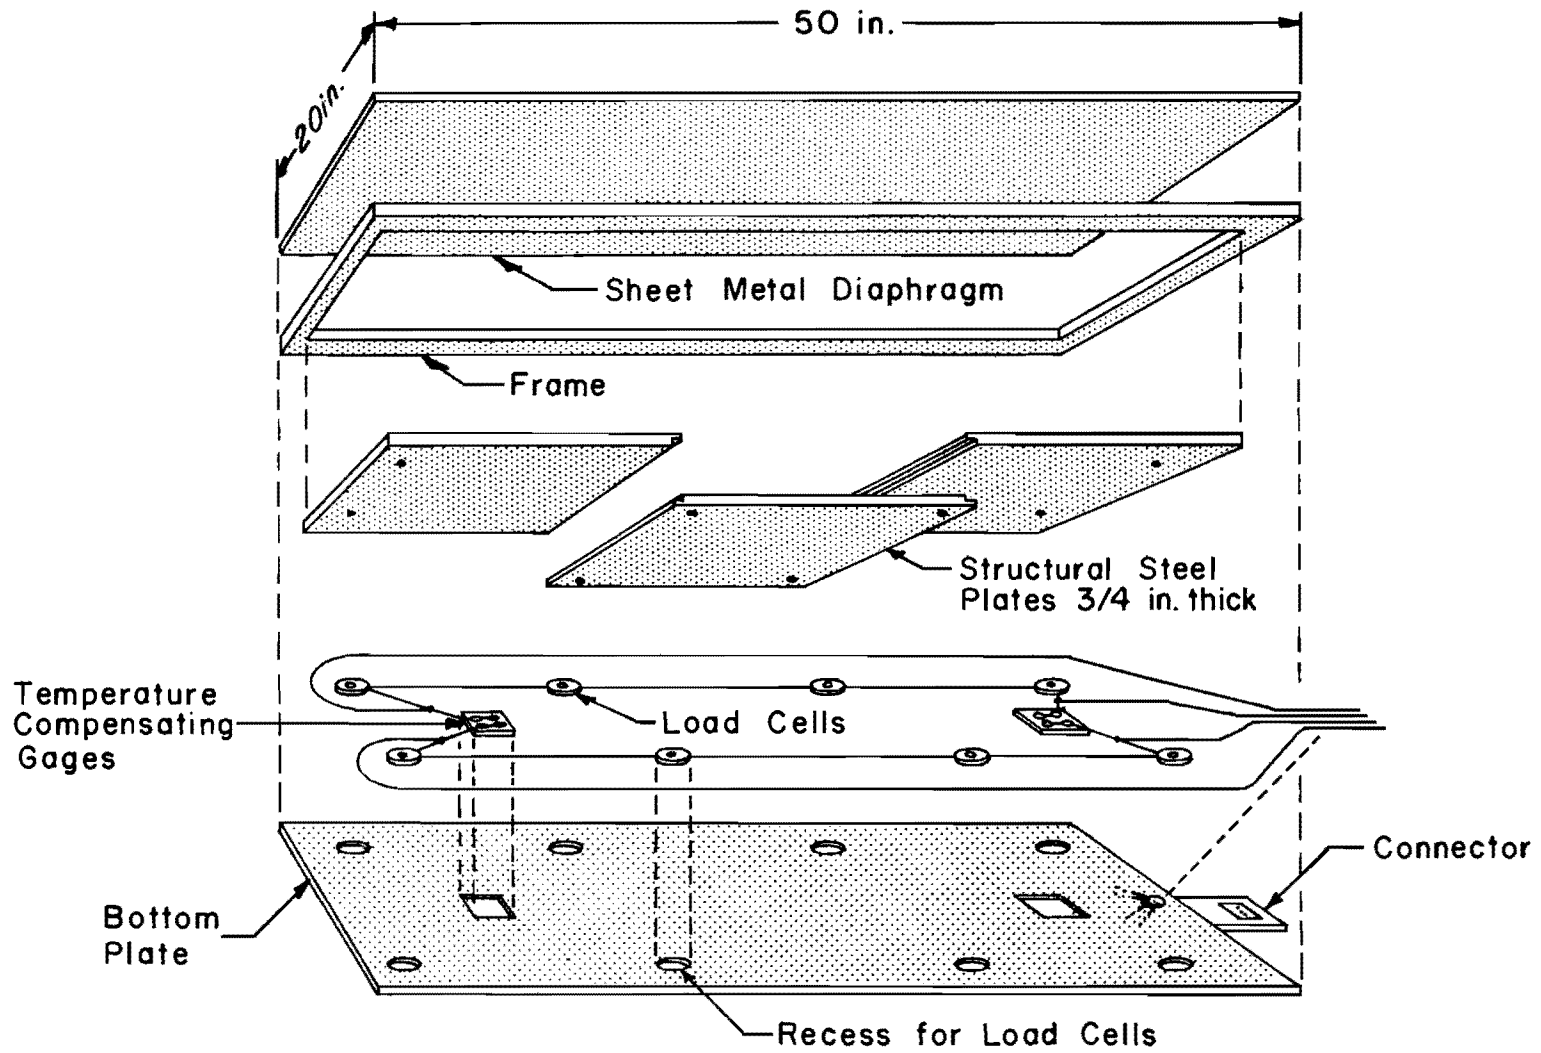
Exploded view of wheel load transducer showing arrangements of components.
